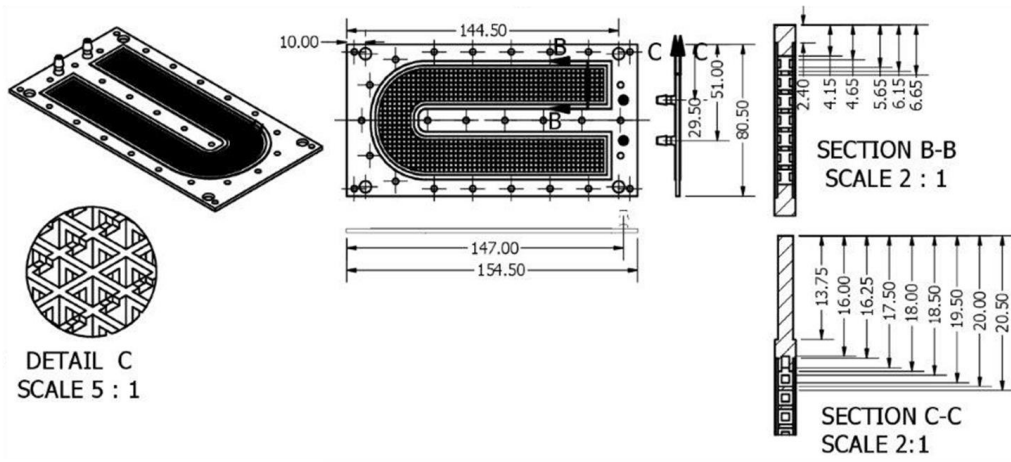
Construction drawing with dimensioning of the small prototype membrane module.
